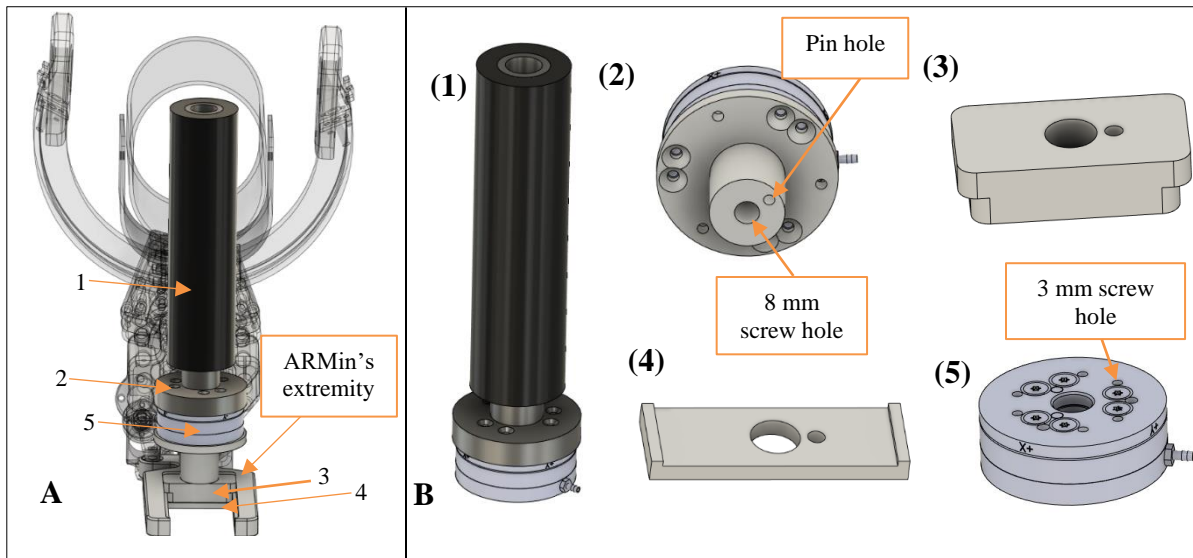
(A) CAD Model of the previous ARMin end-effector and (B) the parts that made the connection between this end-effector (1) and the extremity of the robot: (2) round adapter plate that subsequently extends into a cylindrical shape and that connects to the force/torque sensor in the same way as the EE, through six M3 screws; (3) one of the two parts that connect directly to the end of the exoskeleton. It slides across the extremity allowing to adjust the distance from the forearm to the fingertips; (4) the second part directly attached to the exoskeleton, connecting to the other parts through the M8 screw and a pin; (5) FTD-Mini-45 SI-580-20 force/torque sensor.
